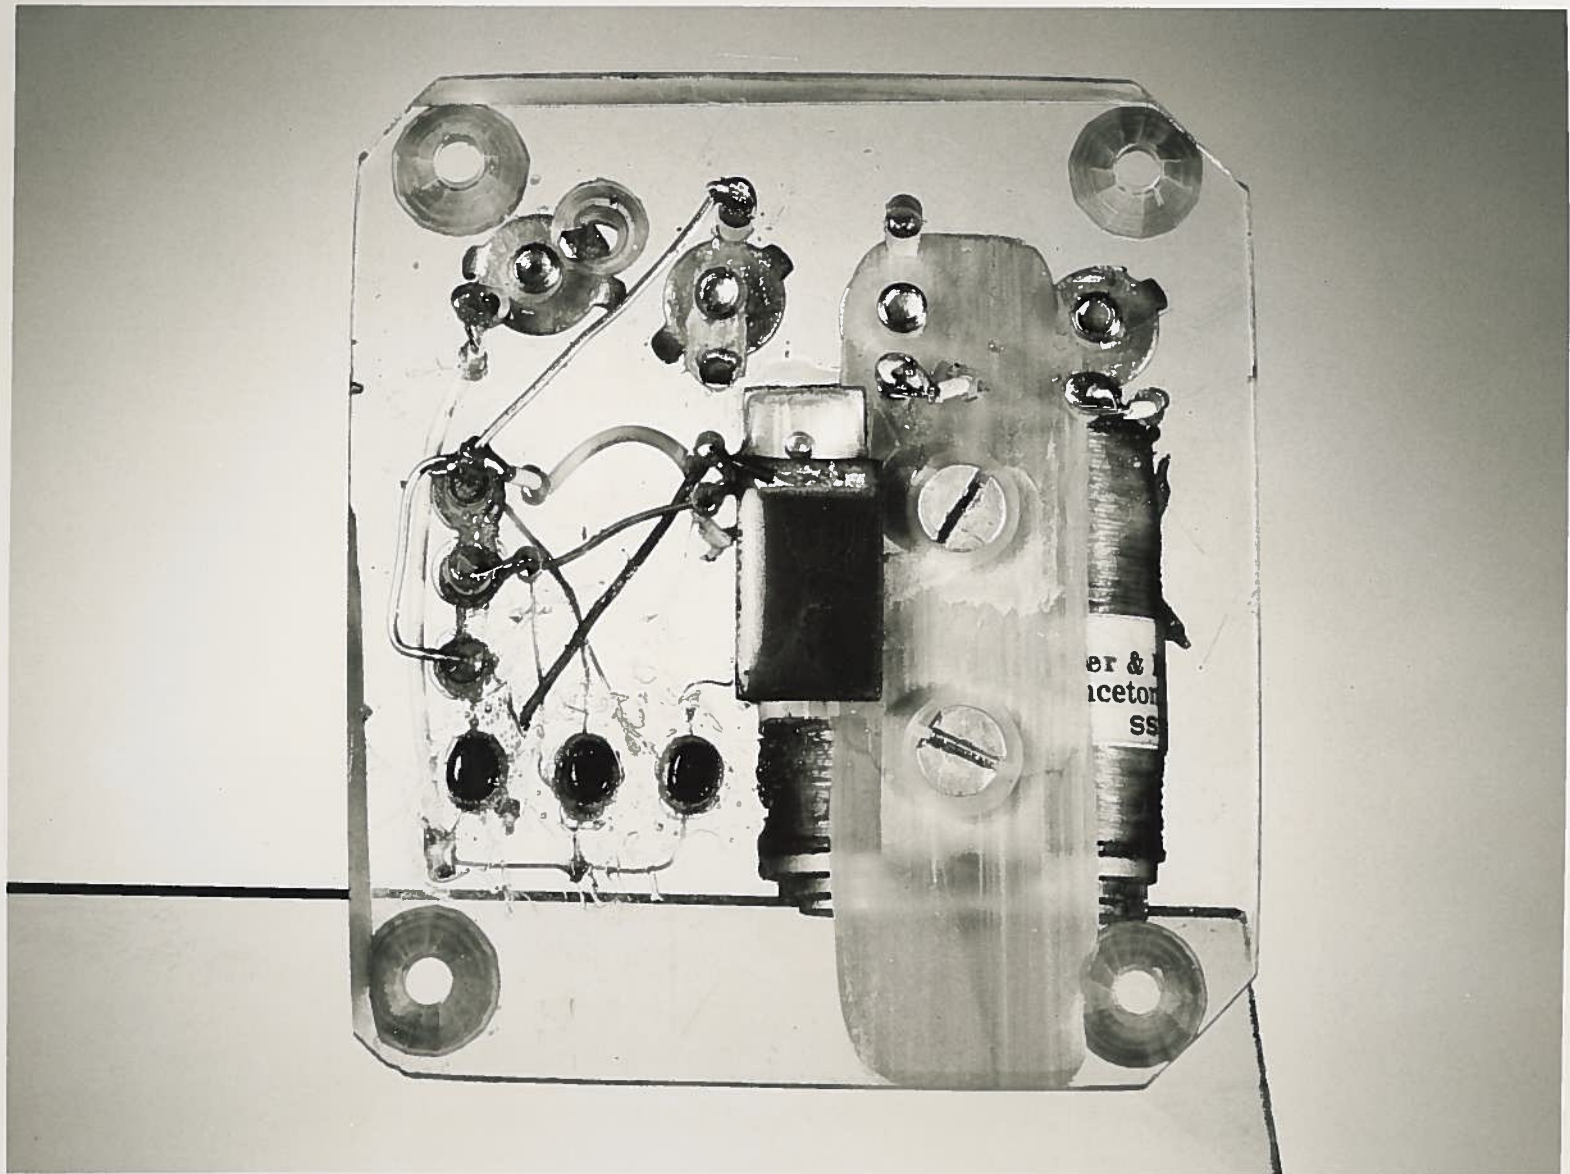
PLATE I PROTOTYPE OF DAYLIGHT SWITCH ASSEMBLY, FRONT VIEW
